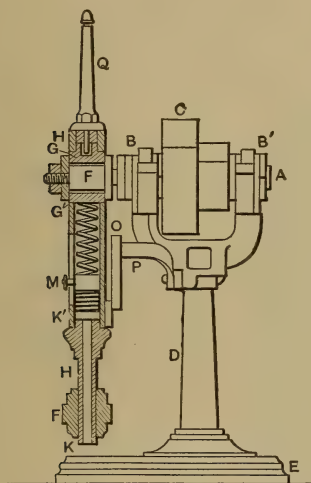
SECTION OF THURSTON'S OIL-TESTING MACHINE.
